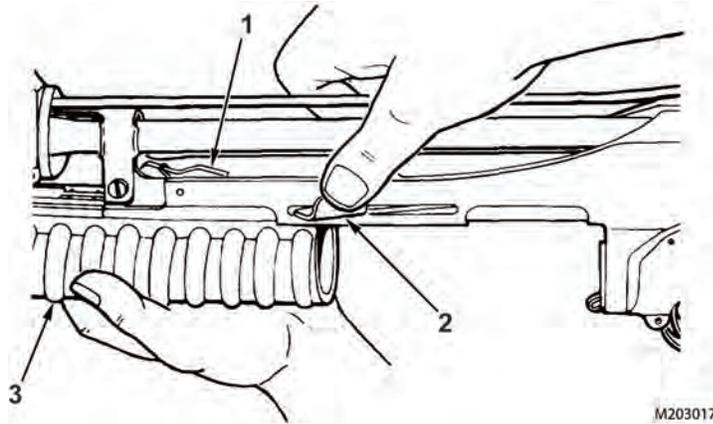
Attaching Barrel Assembly to Barrel Stop.
